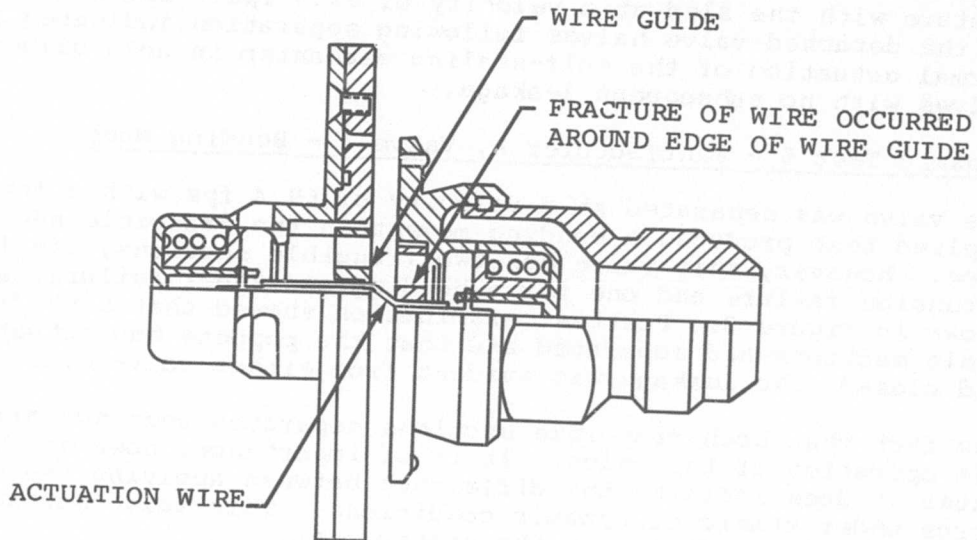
Schematic of Valve 3, Showing Wire Fracture After Dynamic Load.
